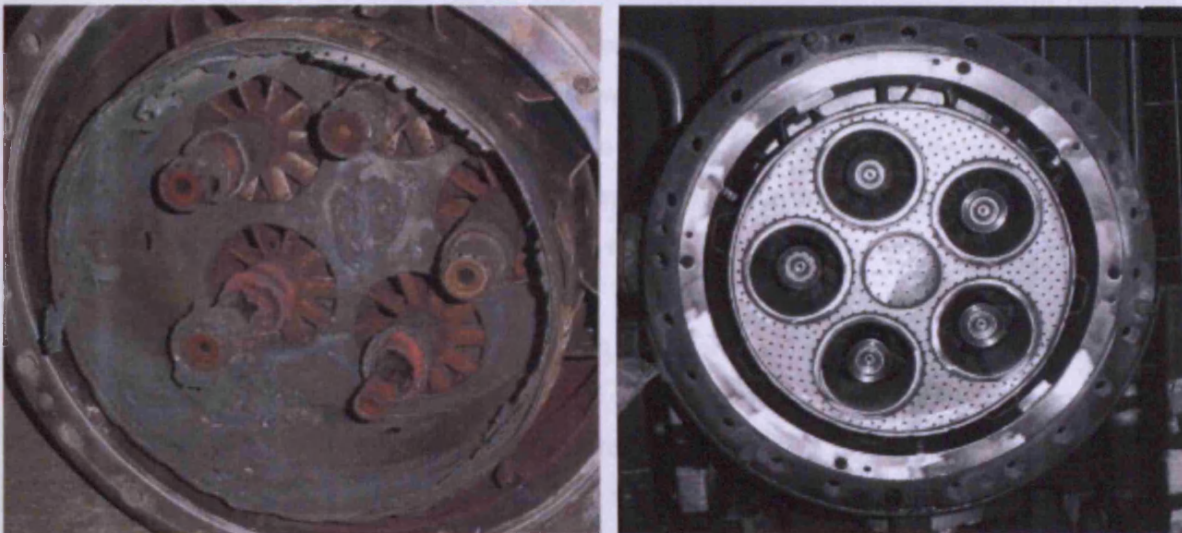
Burner assembly (left) damaged by combustion instability and new burner assembly (right) [21].
